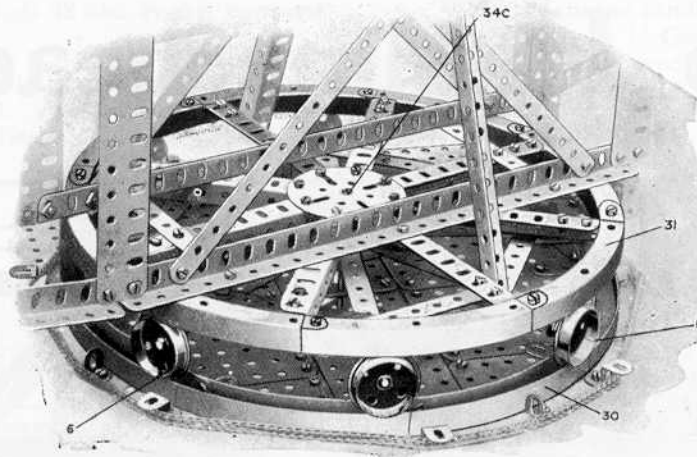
The Roller Bearings, completely assembled. Note how the main Boom is secured.
